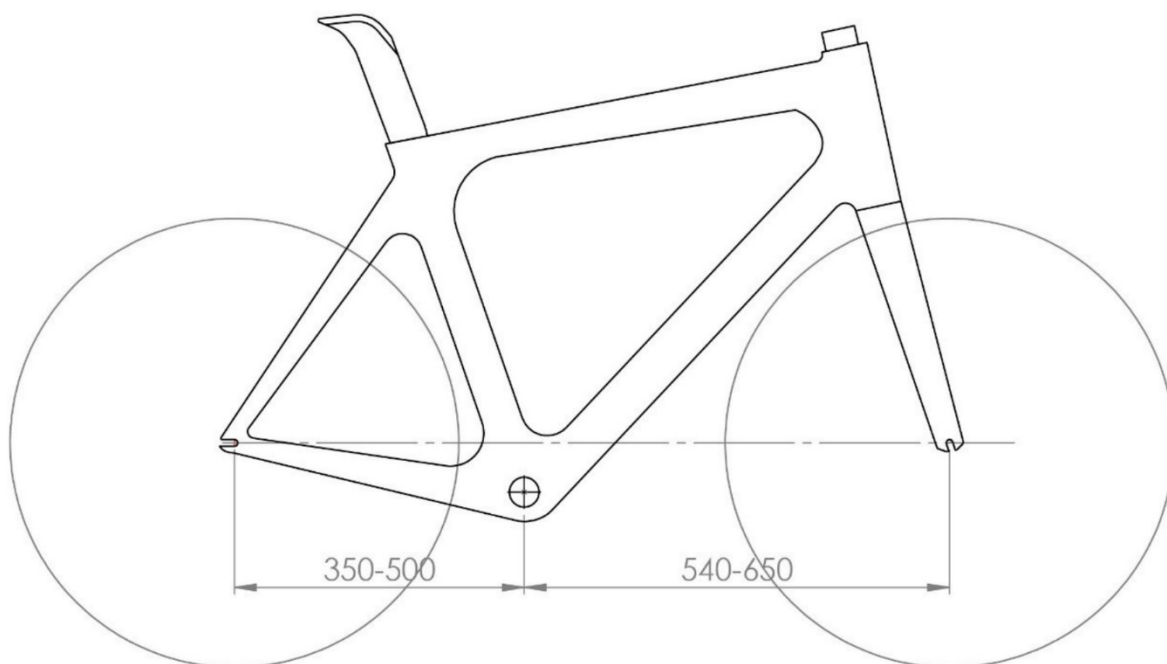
Illustration of the minimum and maximum distances between the bottom bracket and front and rear wheel axles
